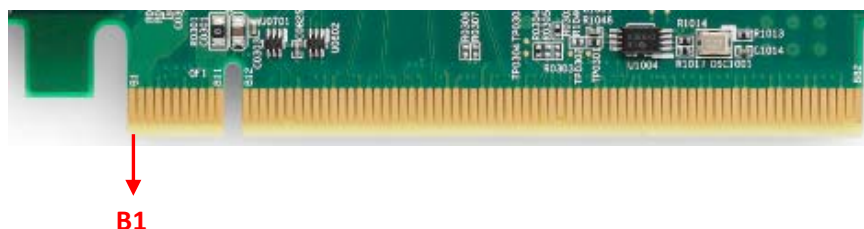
10GbE BASE-T Card Mechanical Drawing
